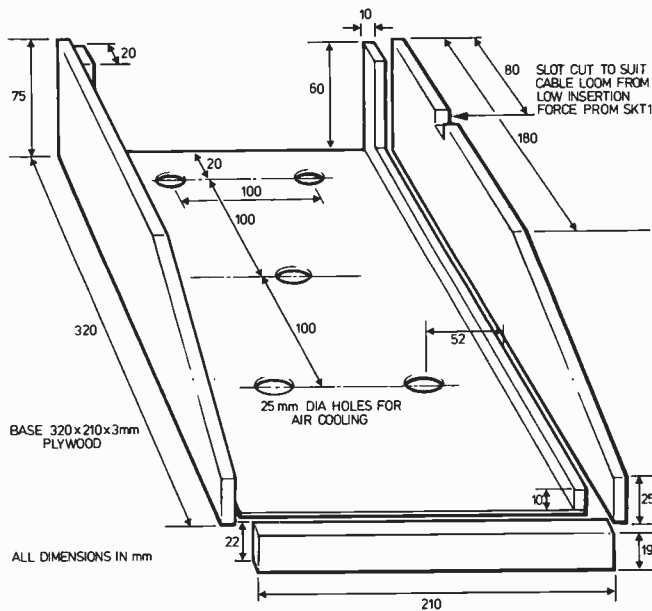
Physical dimensions of CHAMP-PROG chassis
